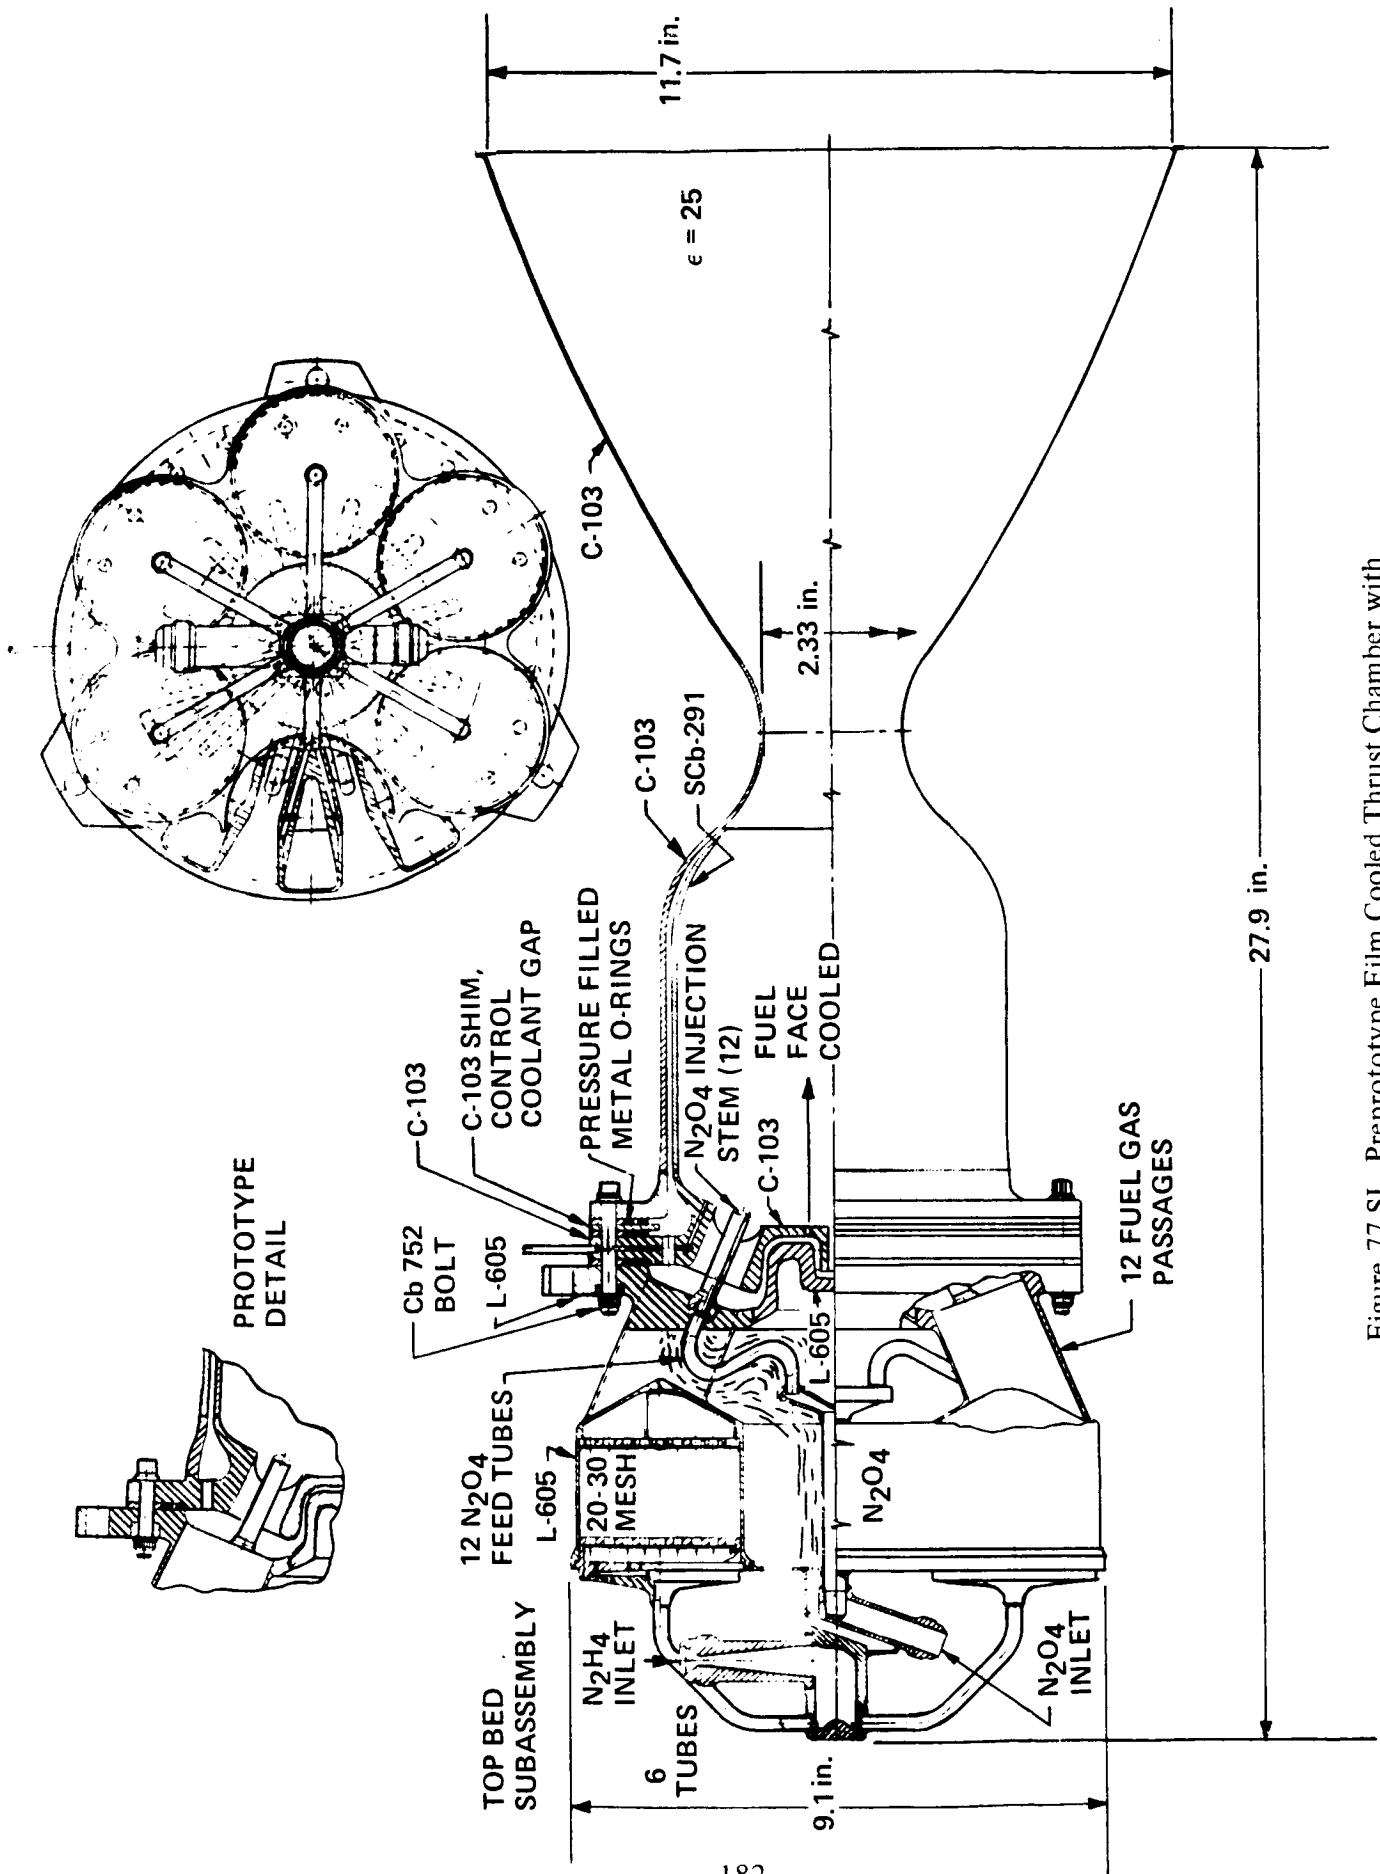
SI. Preprototype Film Cooled Thrust Chamber with 6% Fuel Cooled Injector Face
